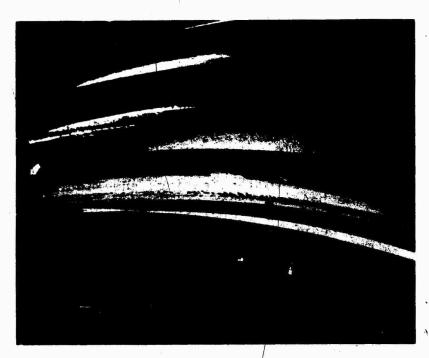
Pitting in Flank of Input Pinion (P/N 114D2045-5).
